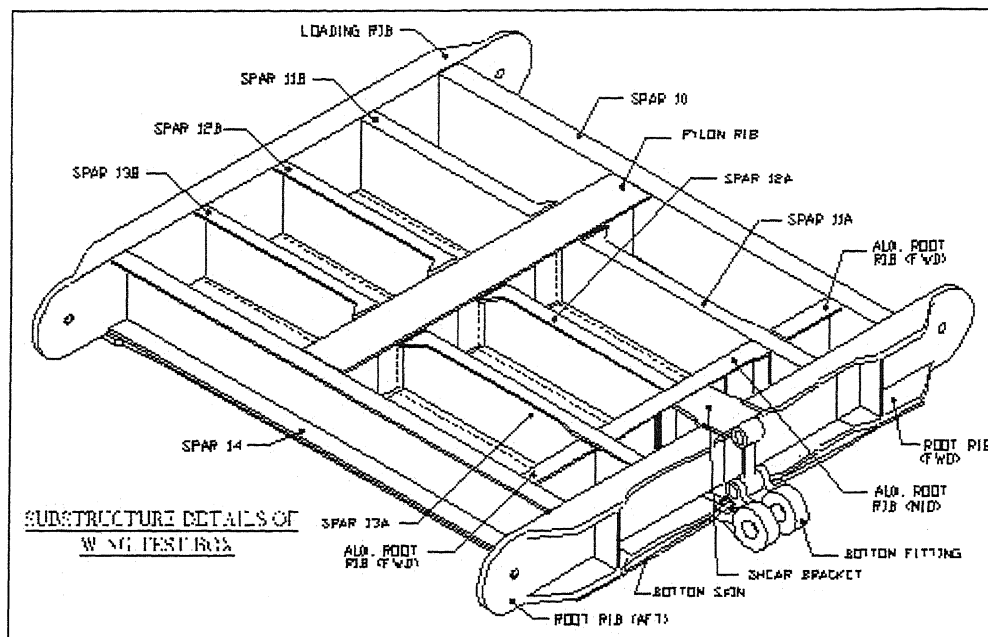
Wing test box assembly (top skin has been removed to show internal details)
